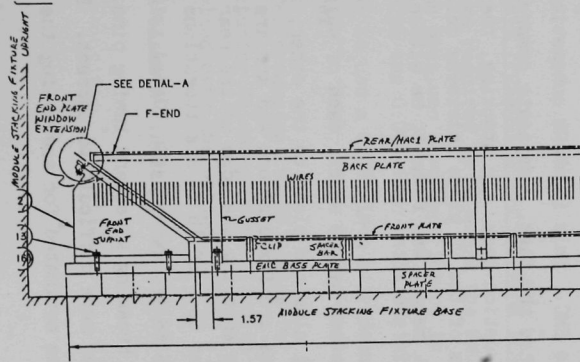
Front end of EMC stacking fixture as assembled on the bed of the main module stacking fixture.
